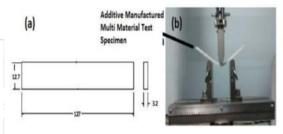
(a) Dimensions of ASTM D790 flexural test specimen [12], (b) three point bending fixture for flexural test
